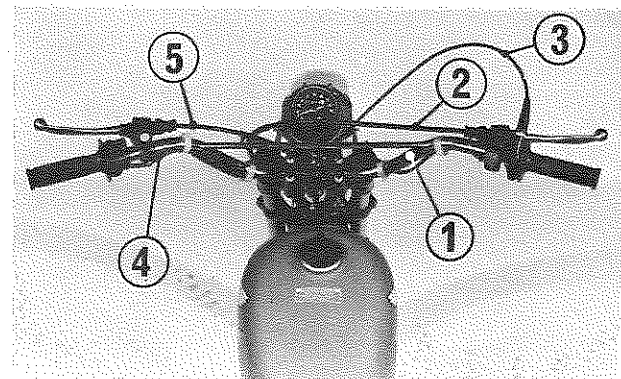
(1) Handlebar (4) Headlight switch wire
